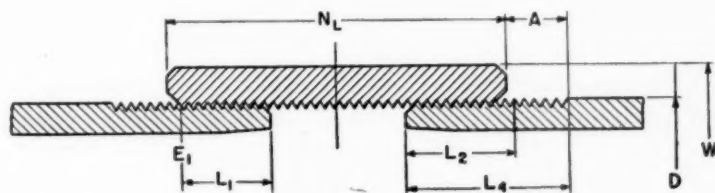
Hand Tight Assembly Dimensions for Use with Accompanying Table VII.
